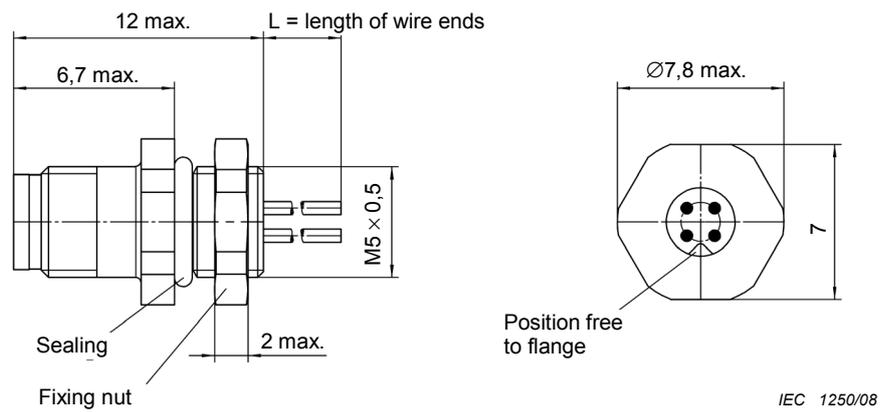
Fixed connector, male contacts, mounting with thread $M5 \times 0,5$, with wire ends, single hole mounting $M5 \times 0,5$, mounting orientation
